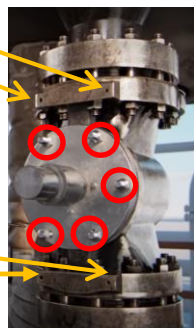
Bolts and nuts of pressure-retaining valve cover highlighted
